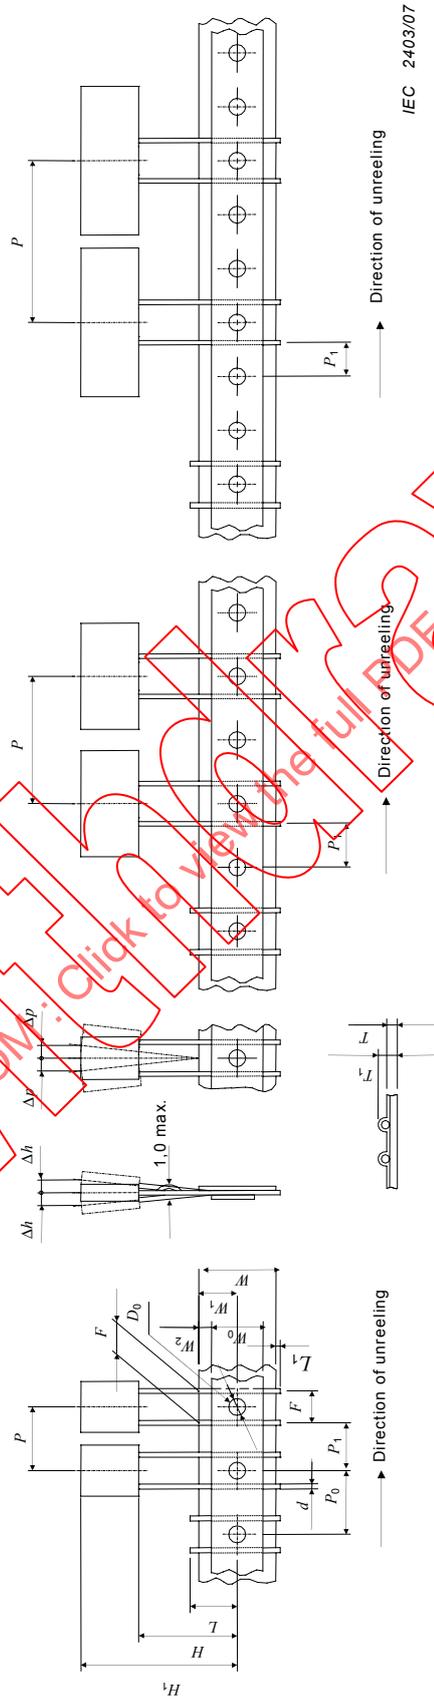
Dimensions for two straight leads, sprocket hole between parts
